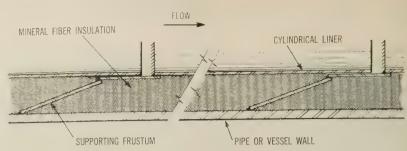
Typical cross-section of Insidline insulation and pipe wall.
